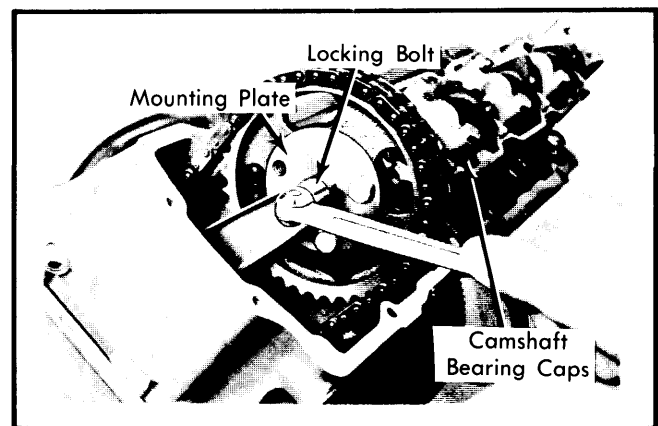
Locking Camshaft Sprocket and Chain to Mounting Plate
